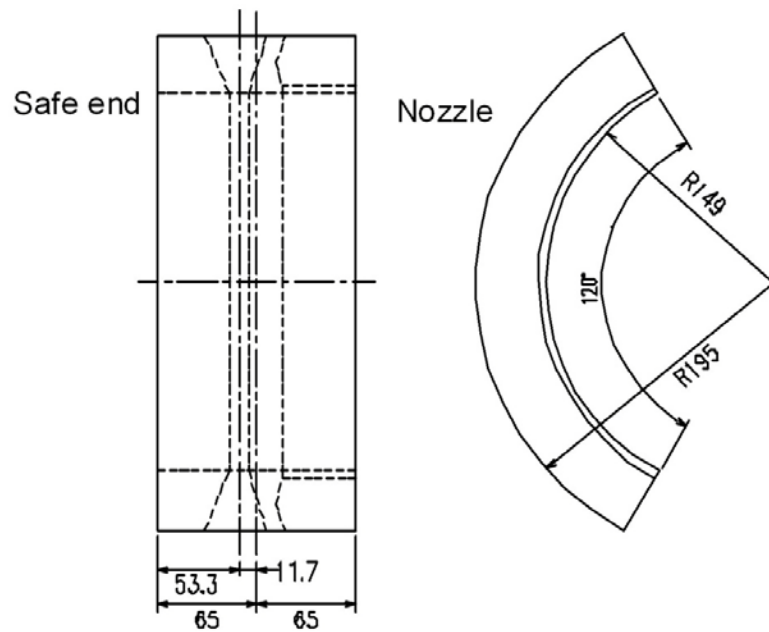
PINC Test Blocks 2.4 through 2.6 Test Blocks (JNES No. ST1 to ST3) – PZR Surge Line to Safe-End Dissimilar Metal Weld Test Blocks
